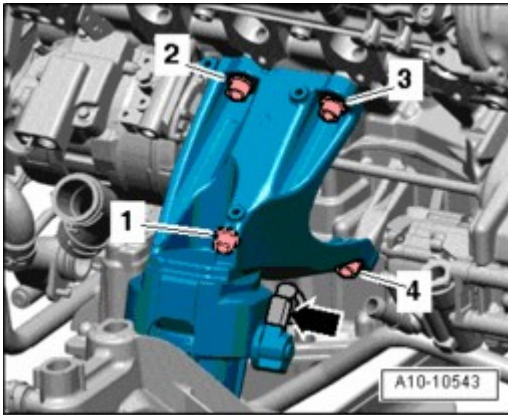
Disconnecting Electrical Harness Connector At Left Engine Mount & Removing Bolts And Engine Support From Engine Mount
